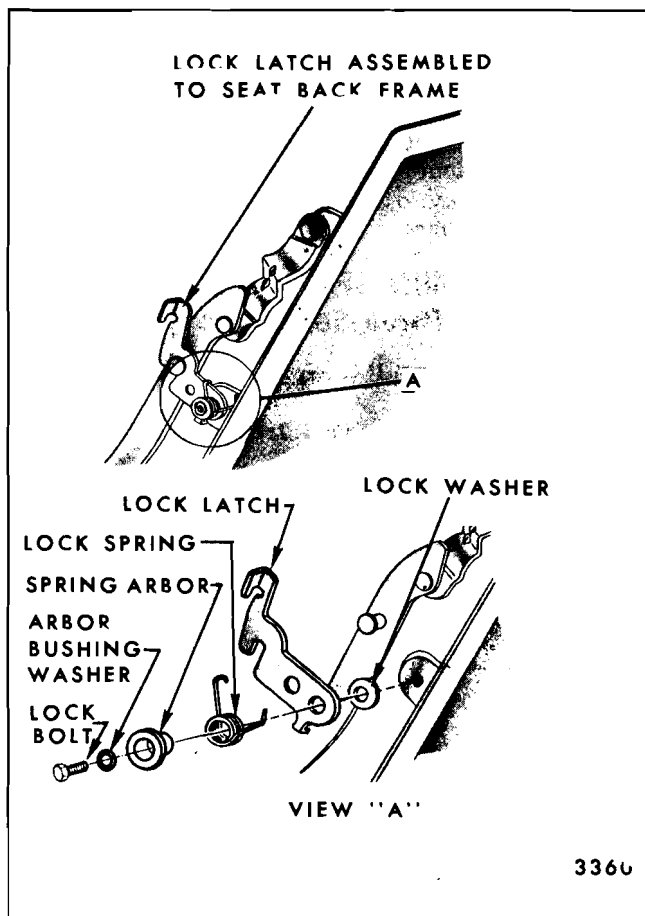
Third Seat Back Lock - "A & B" Body Three-Seat Station Wagons
